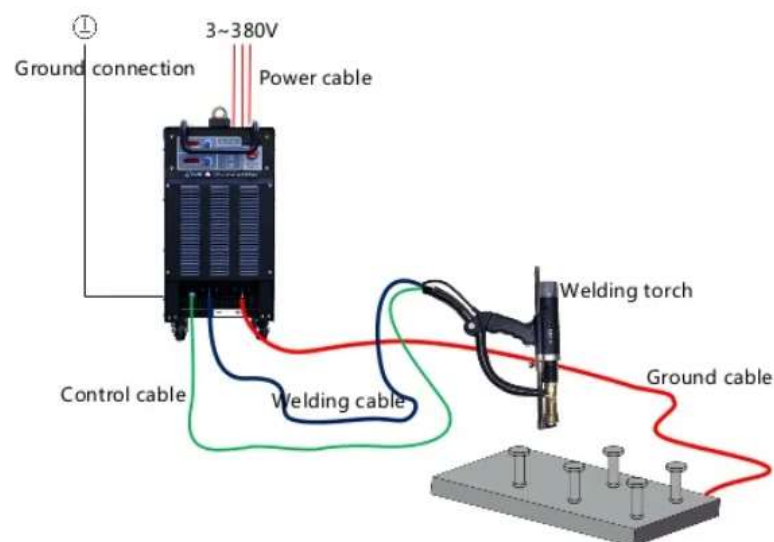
Welding sketch for stud arc welding (Lesson, 2020)
